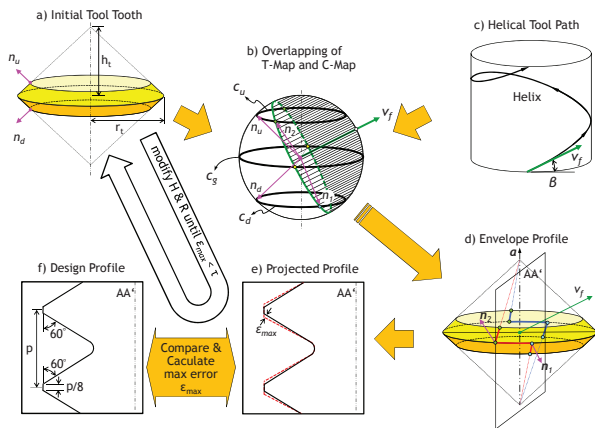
Schematic flow diagram for the calculation of optimal thread milling cutter tooth design from thread data and helical tool path.
